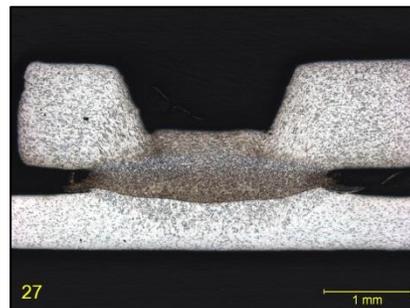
Macro- and Micro-structure of a Weld Made at the 103:1 Transformer Turns-Ratio using the E-Cap Arrangement
